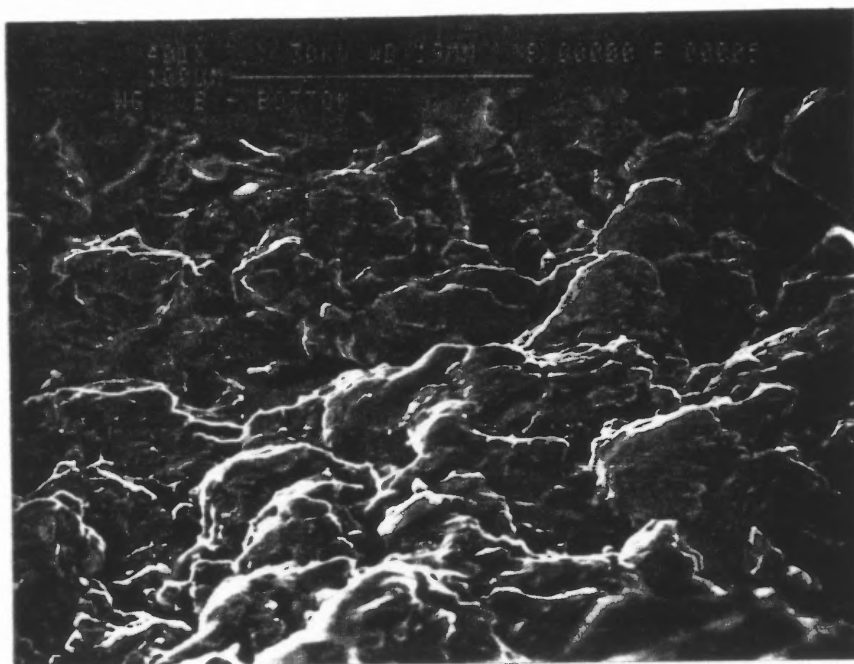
Bottom side of the Sample 3 steel plate under WJ cutting.
